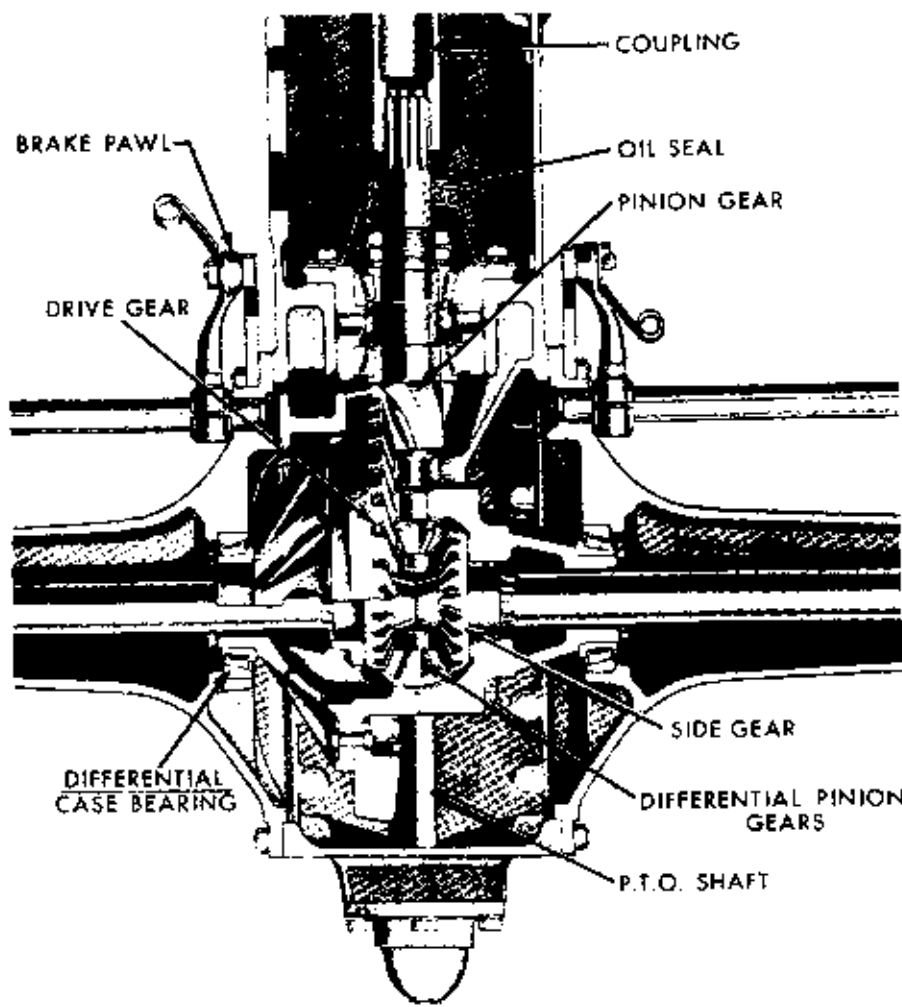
Cross-section view of final drive unit. For exploded view of main drive bevel pinion and differential assembly, refer to Fig. FO54.
